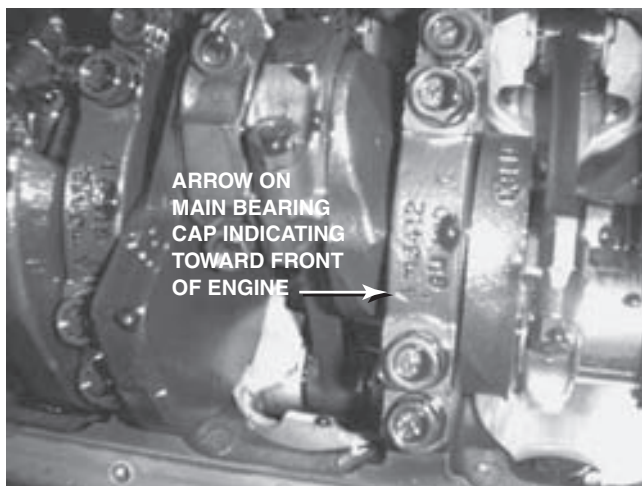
Most engines such as this Chevrolet V-8 with 4-bolt main bearing caps have arrows marked on the bearing caps which should point to the front of the engine.
